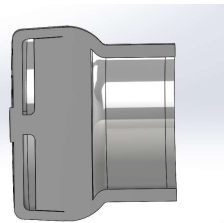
Section-view of original speaking valve design modeled in CAD using SolidWorks
